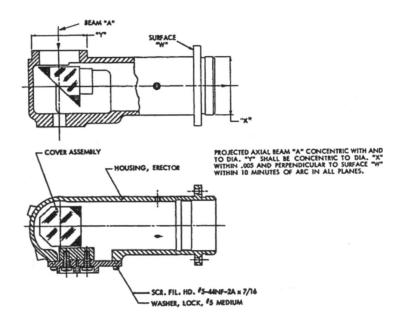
The second right angle prism assembly. (Courtesy of the U.S. Army.
